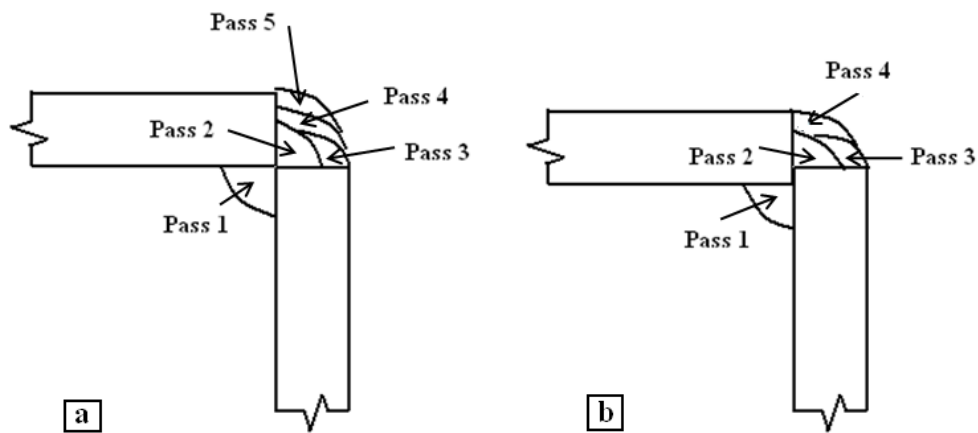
Schematic drawing of the corner joint geometry and location of the weld beads: a – 5 pass joint configuration used for welding with flux-cored wire, b – 4 pass joint configuration utilised for welding with metal-cored wire.
